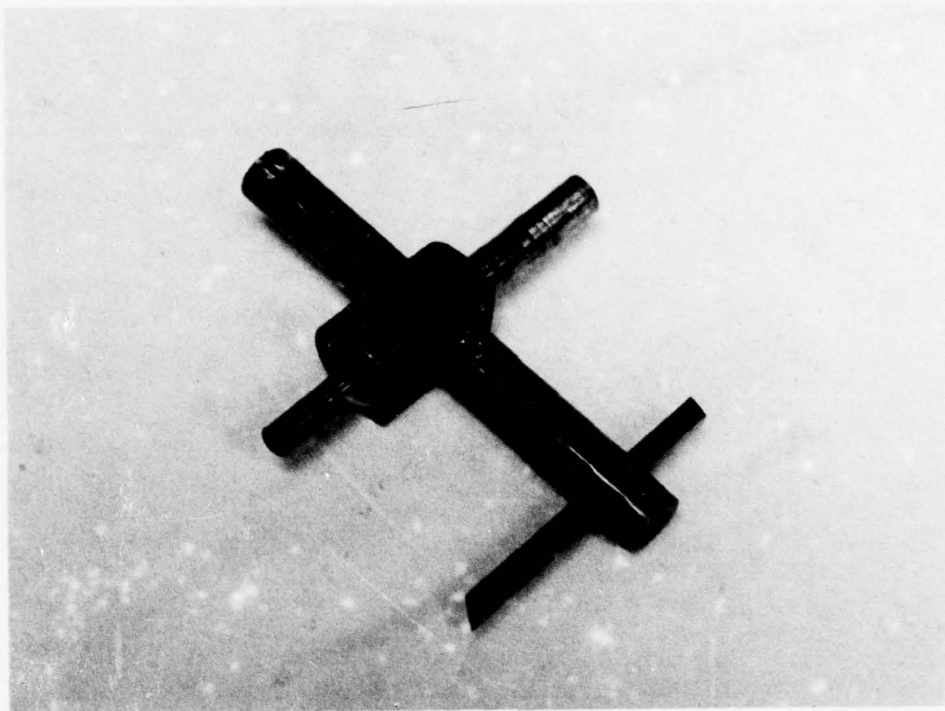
Fly Cutter Used to Remove Skin Material for Repair
